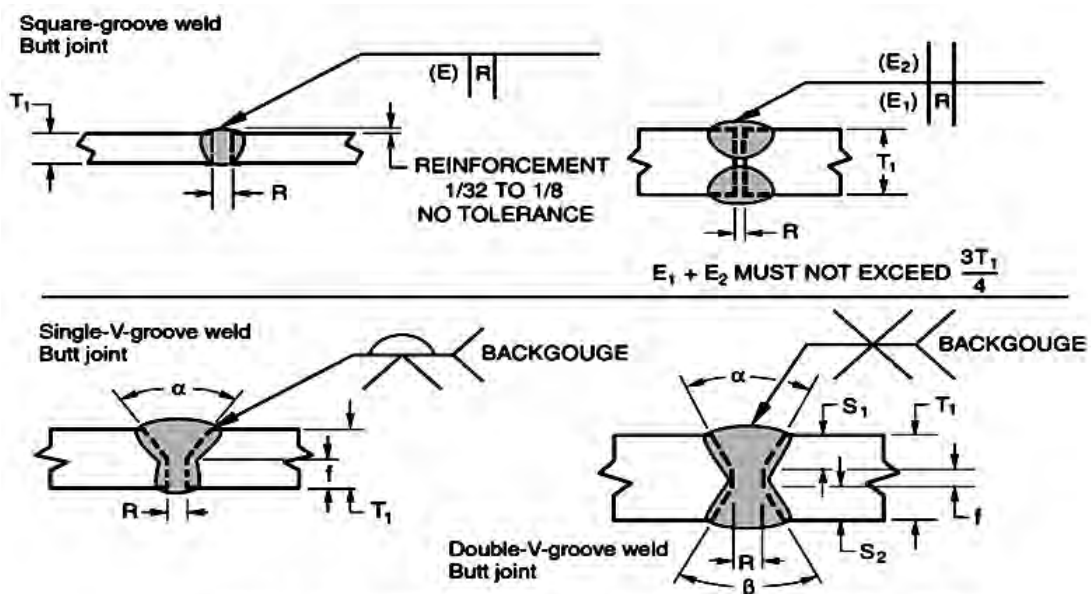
Prequalified PJP Groove Welded Joint Details
